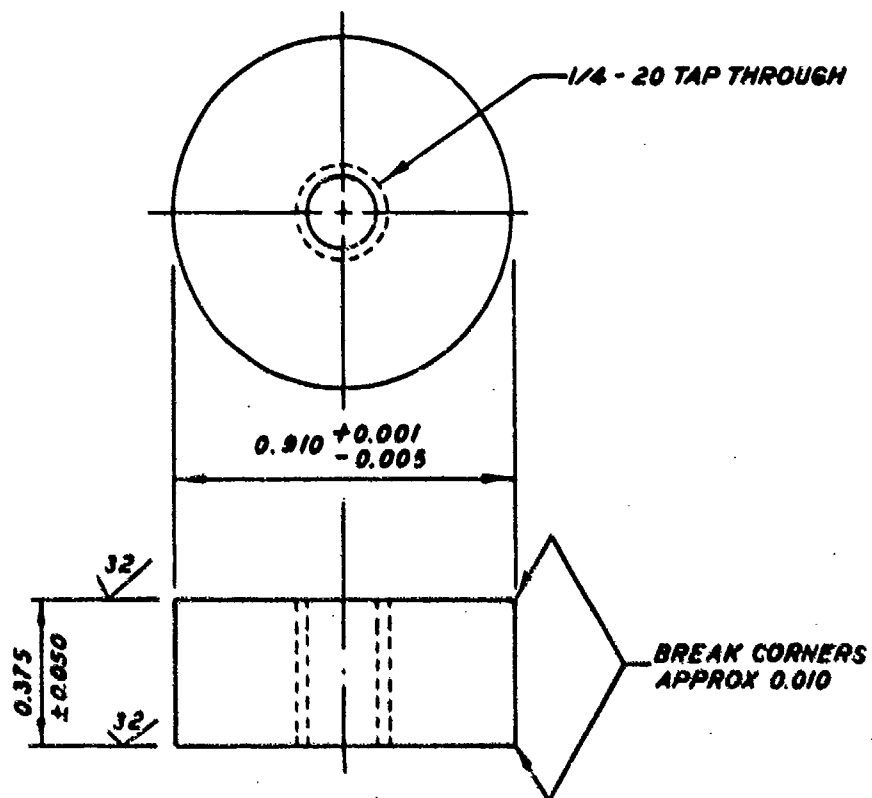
Laboratory calibration fixture. An O-ring with Parker size No. 2-116 is required.
